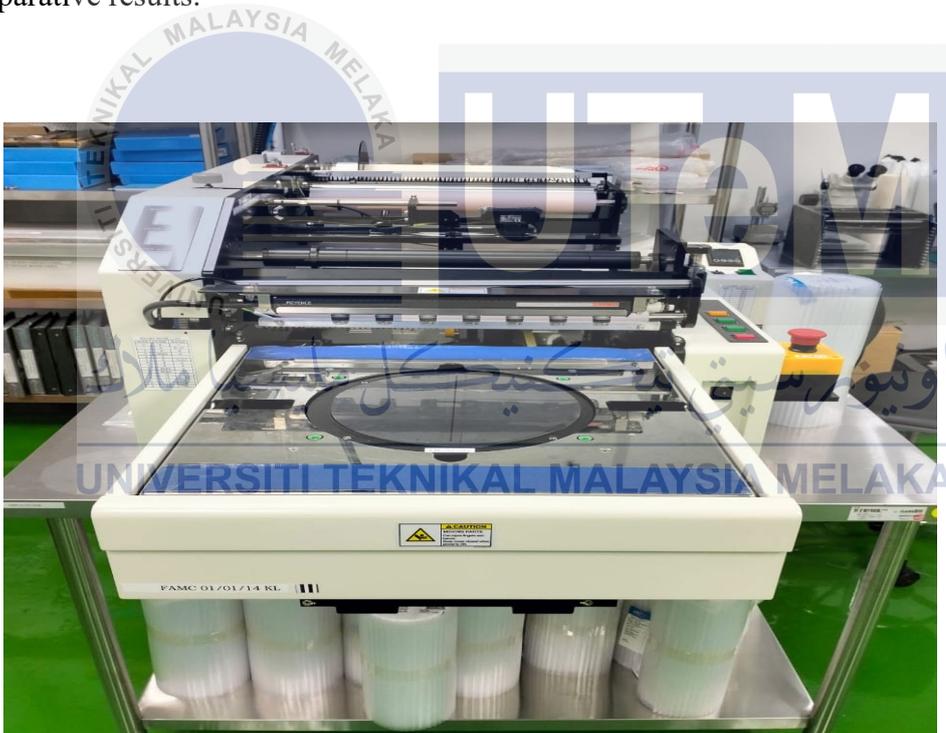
Lintec RAD-2500 wafer mounter machine
